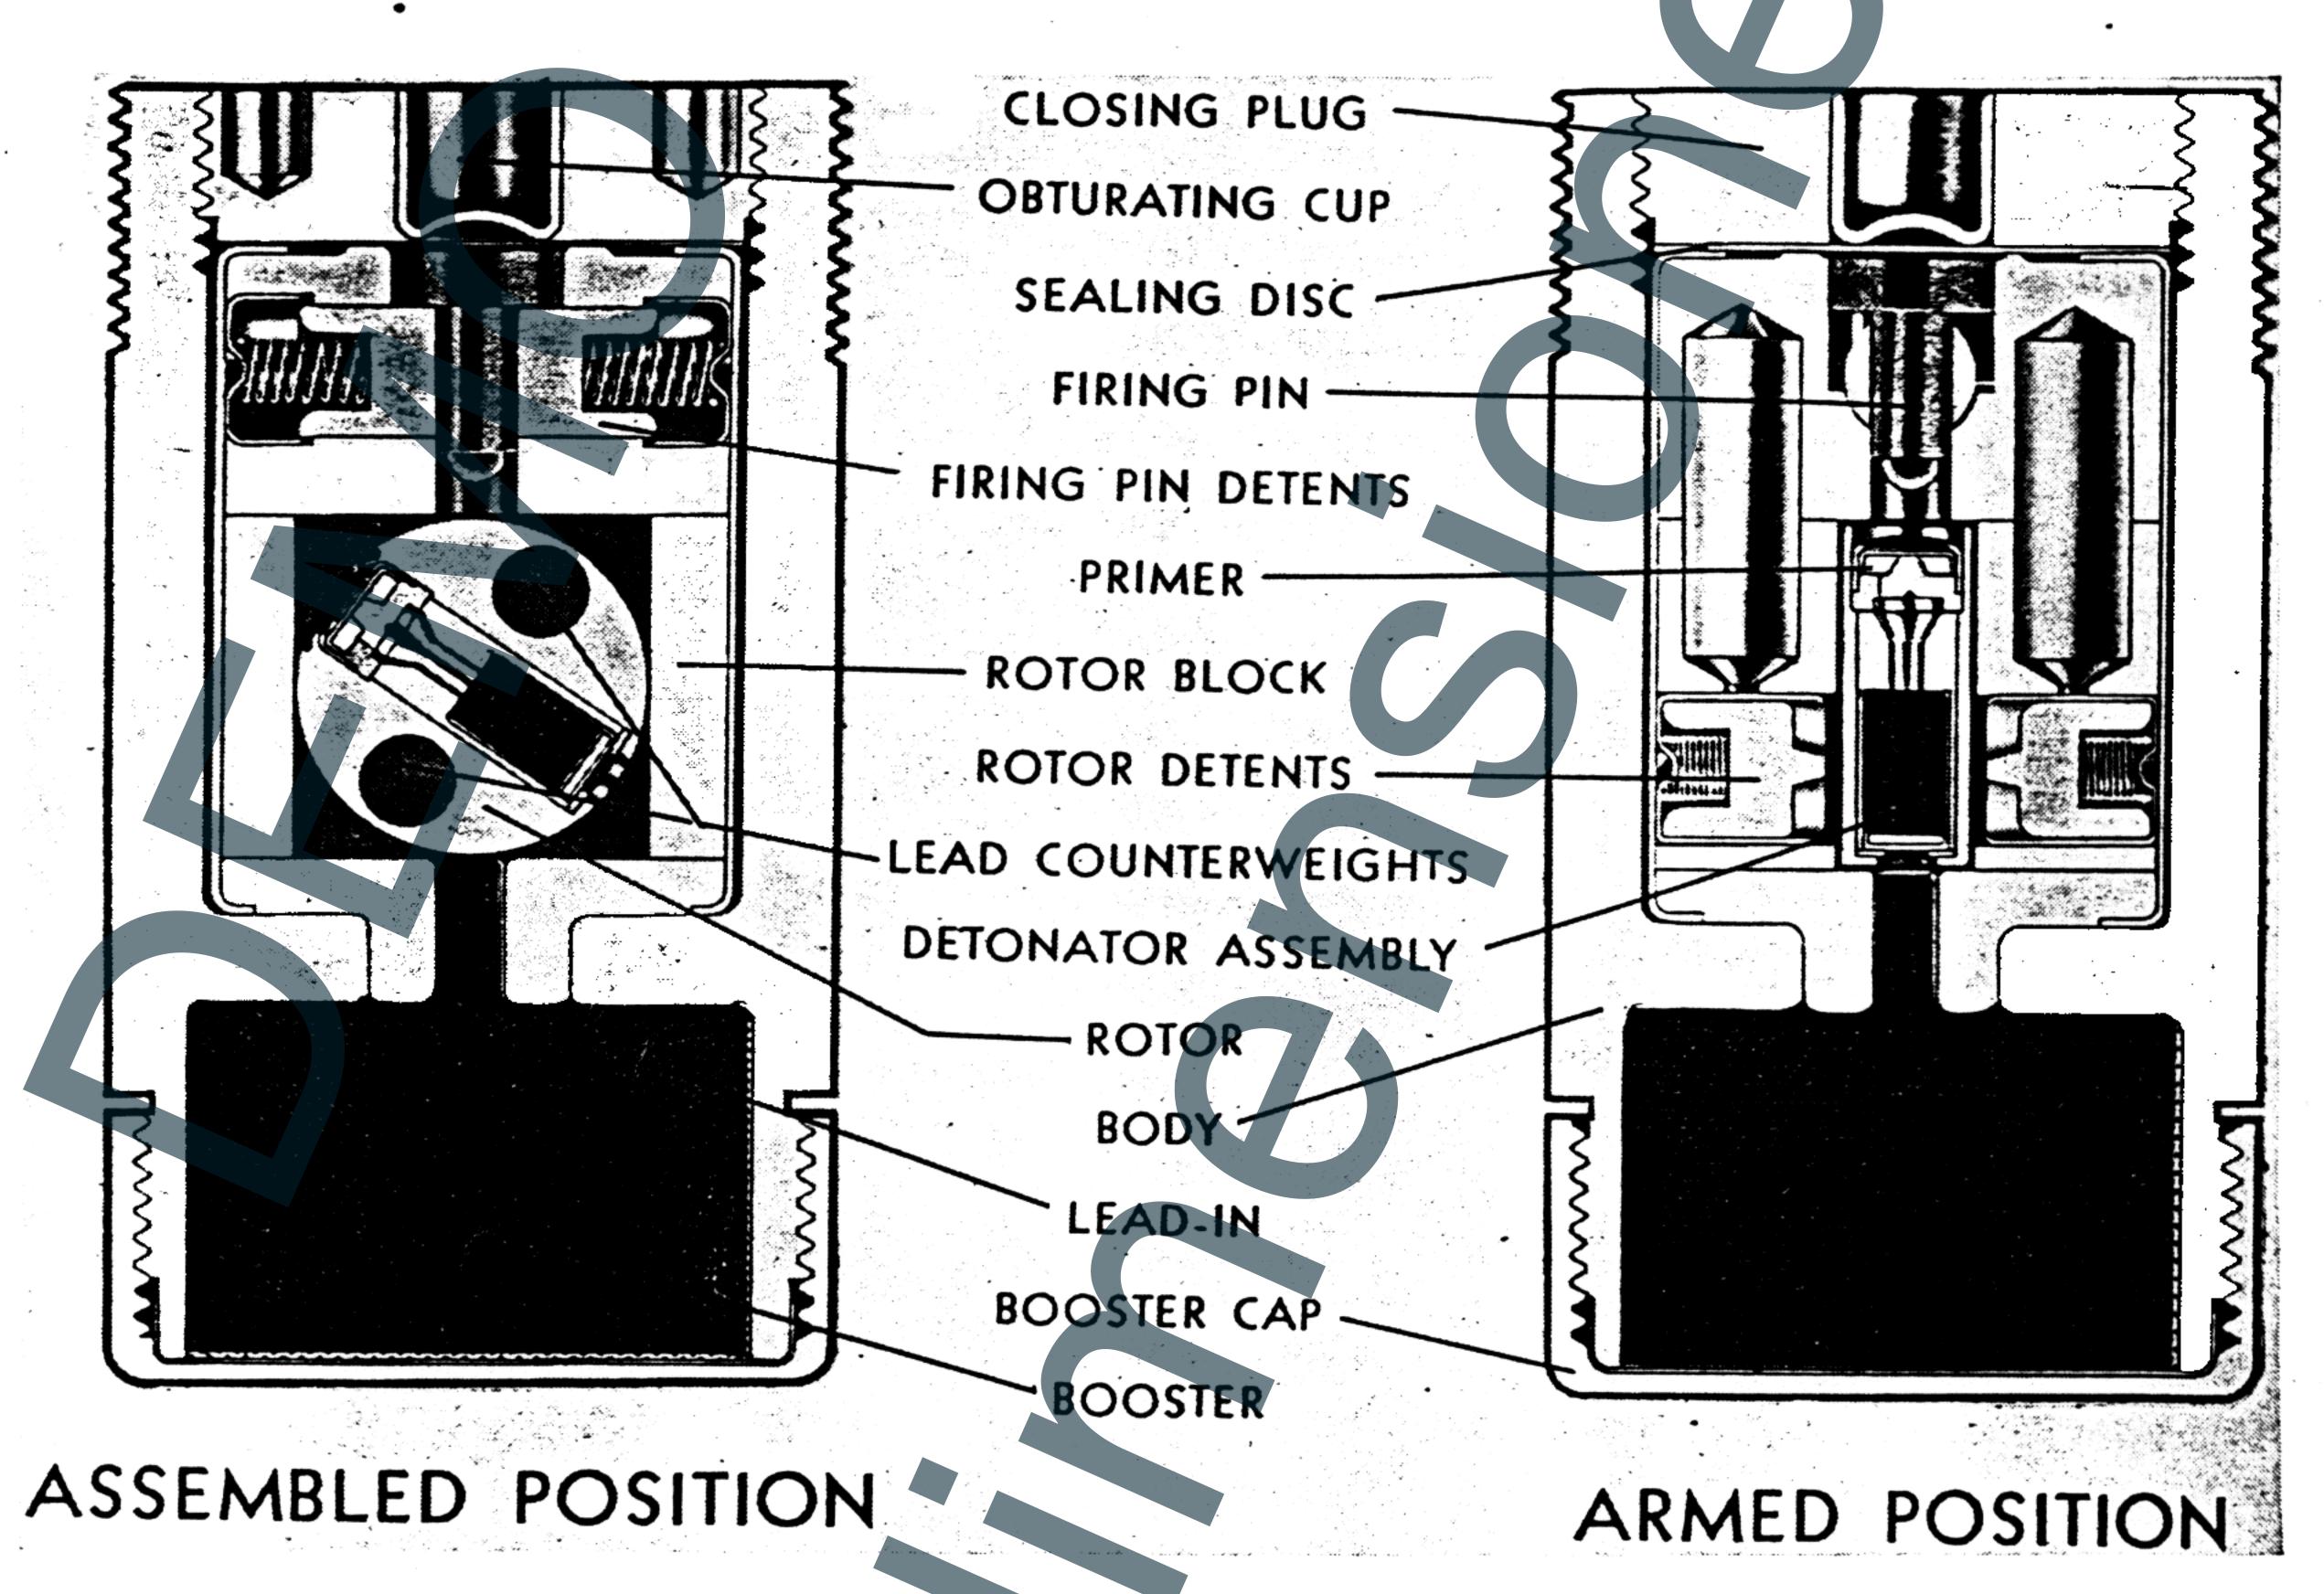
Auxiliary Detonating Fuze Mk 17 Mod 0-7—Sectional View
